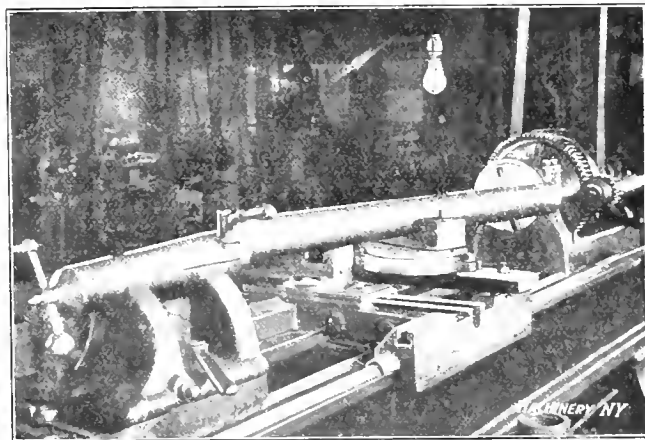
Turntable for Reversing Heavy Work in the Lathe
